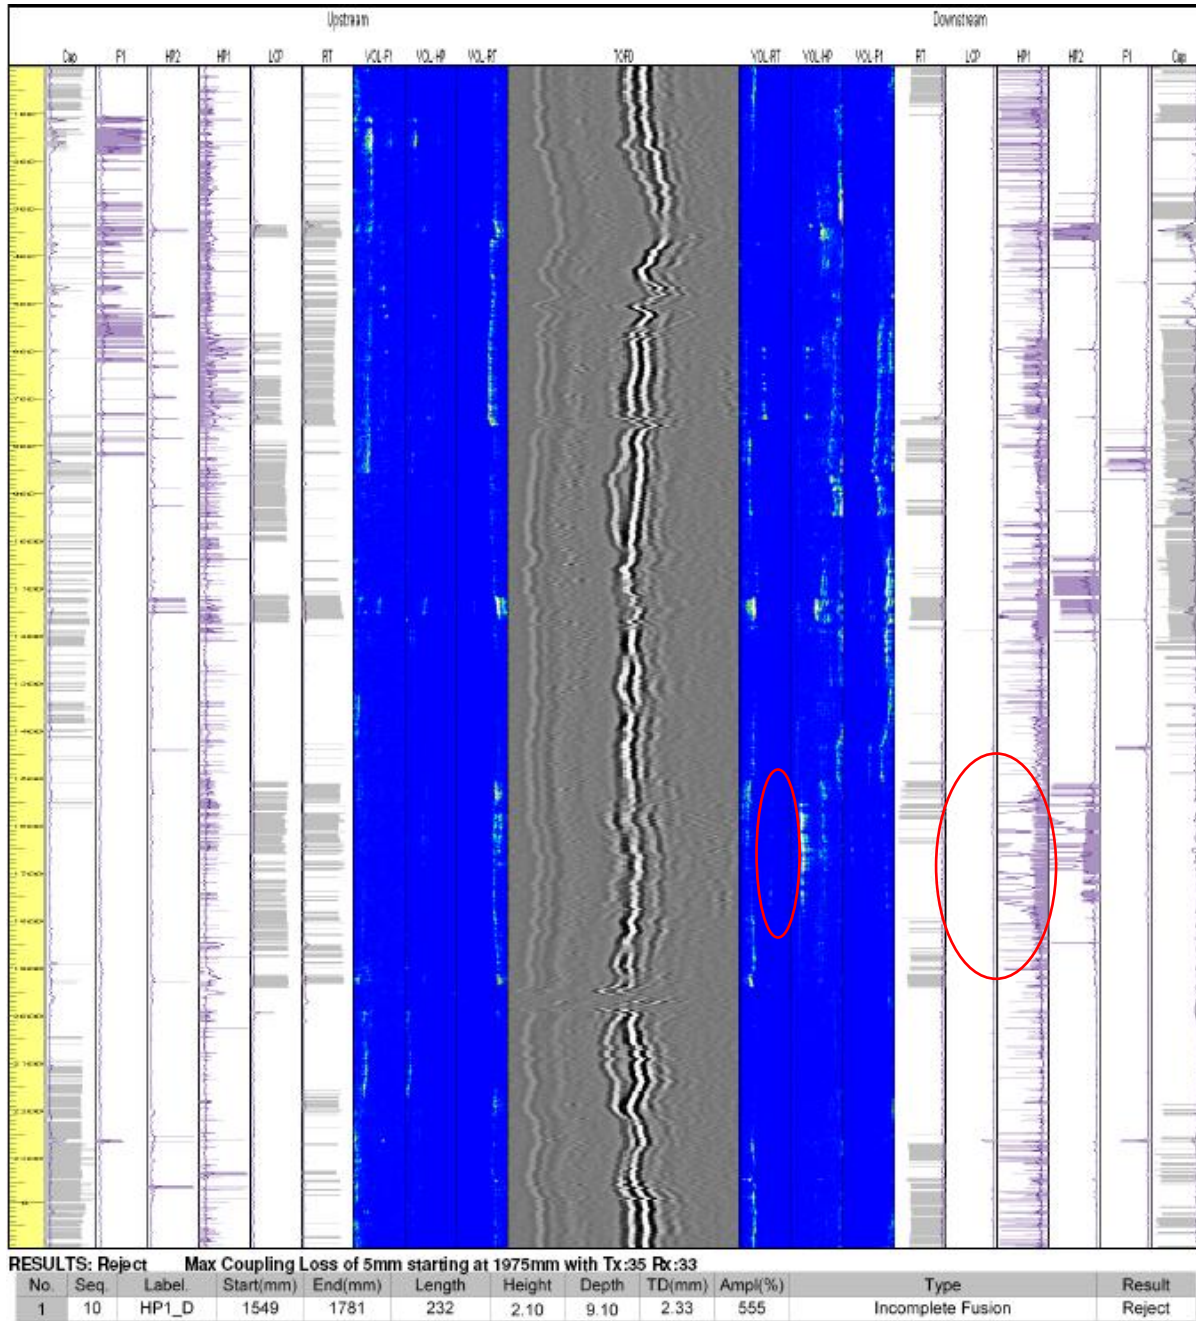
Weld MLA 4890 - UTQ Scan Screen Capture
